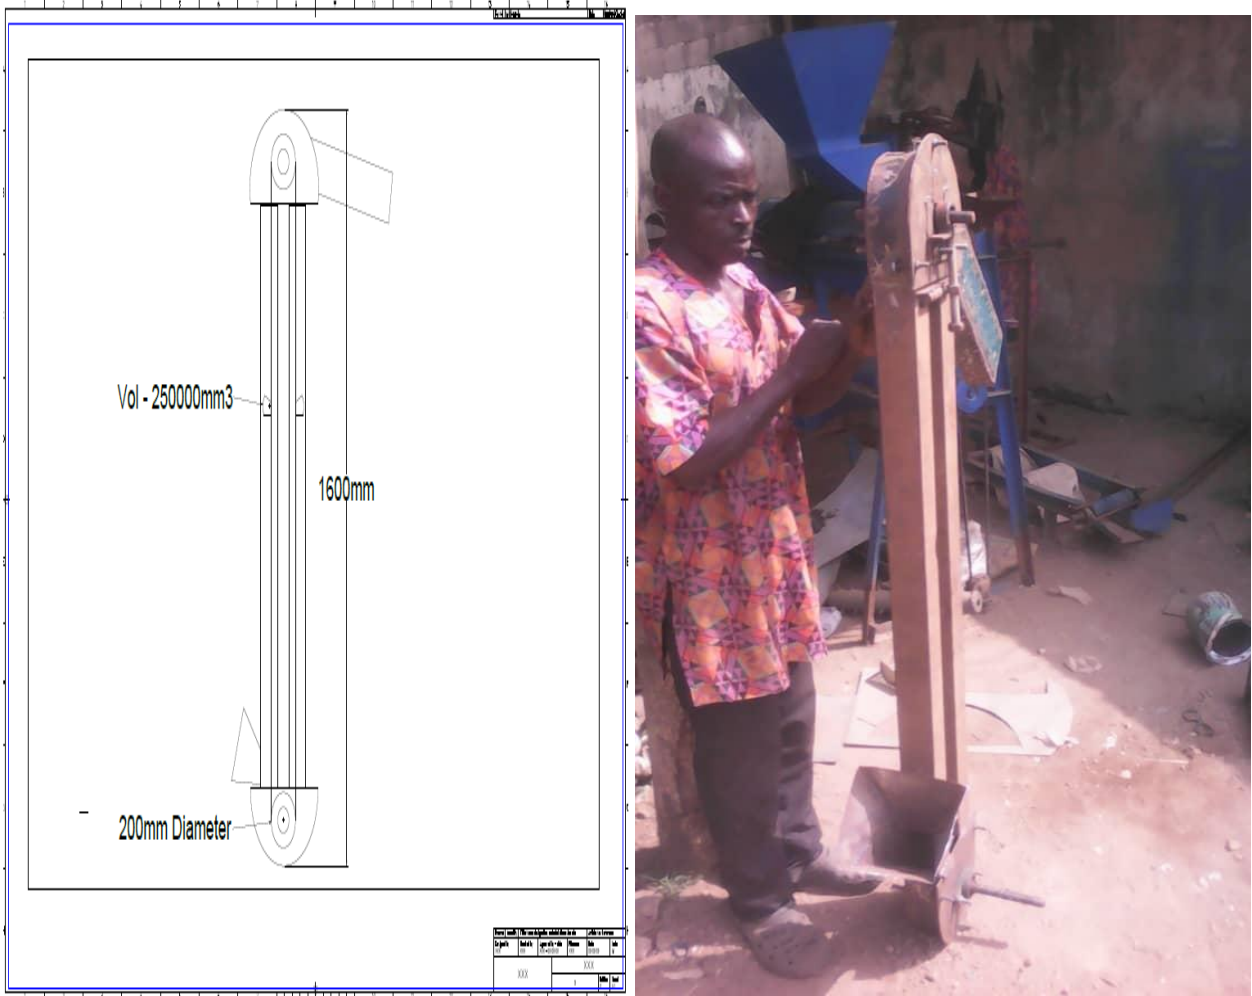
Design drawing and Picture of the constructed of Bucket Convey
